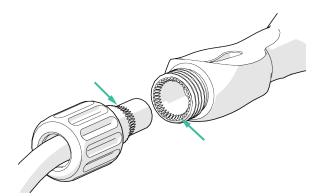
Detail view showing external splines on the tube and internal splines in the handle
